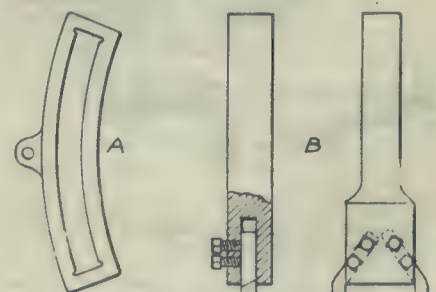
A—TYPE OF LINK TO BE PLANED AND B—ADJUSTABLE TOOL FOR THE PURPOSE.
